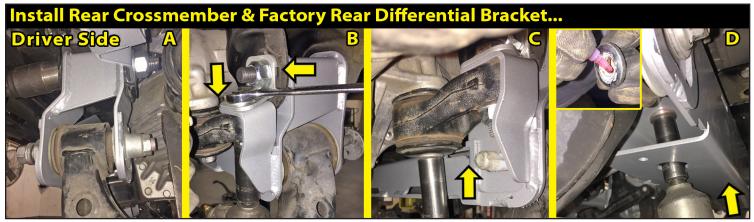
D] Apply thread locker to factory nut, then tighten rear differential mount accessed through rear crossmember {19mm} (90)
